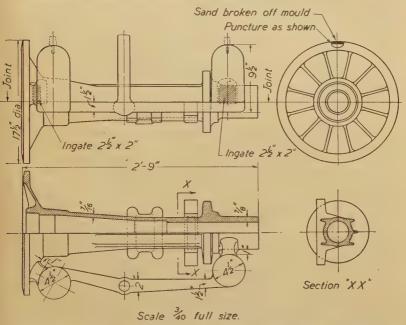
Sketch of Back-Axle Flange. Cavity caused by sand. Weight of casting: 1 cwt. 2 qr.; weight of heads and runners: 1 cwt. 6 lb. = 70%.
